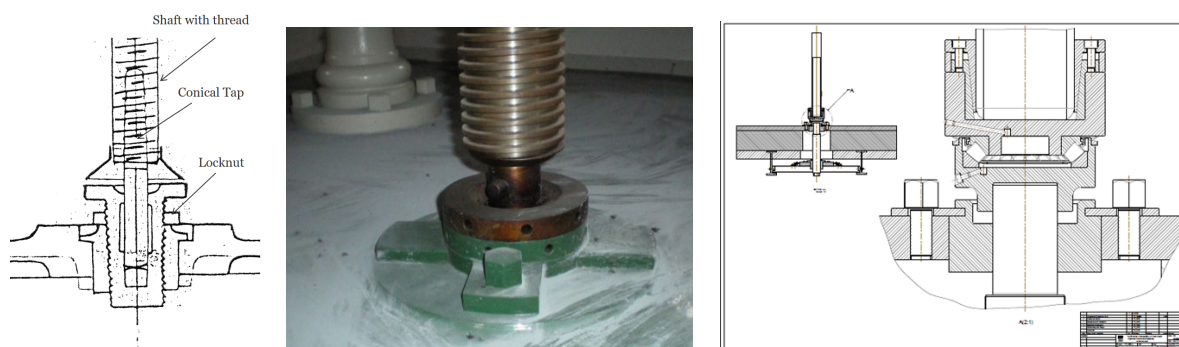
From left to right – cross section drawing – photo - drawing of the new mechanical bearing support.
